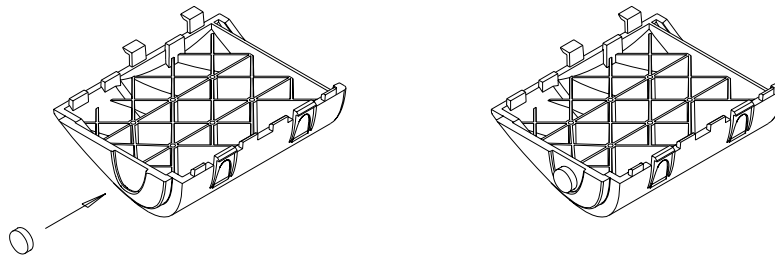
Attaching a Rubber Pad to a Desktop Bumper
